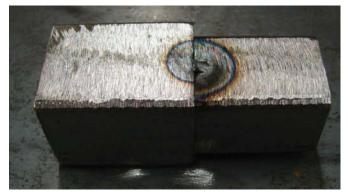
Top and Center Tubes tacked and aligned properly.
